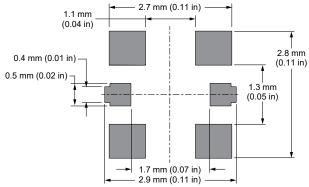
Recommended PCB Dimensions for the CONSWF001-SMD
